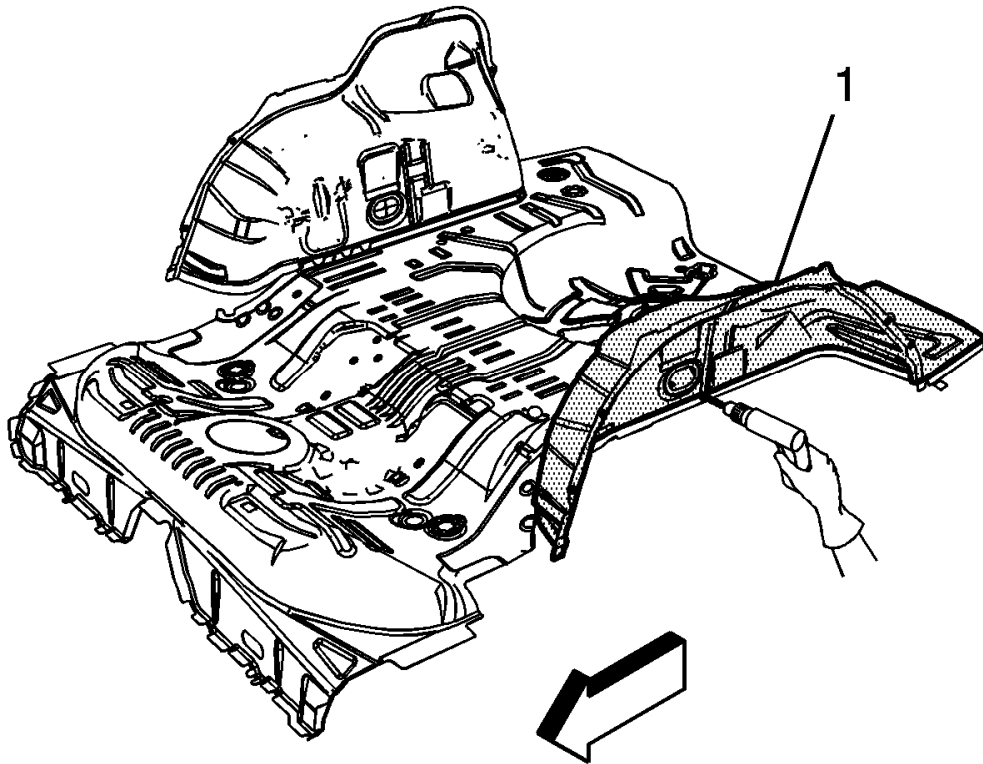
Drilling Out Rear Inner Wheelhouse Factory Welds
